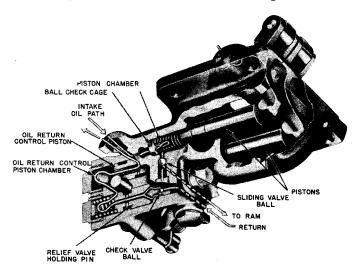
Model "VA" Series Hydraulic Pump (Cutaway View—Pump with Straight Type Pistons)
